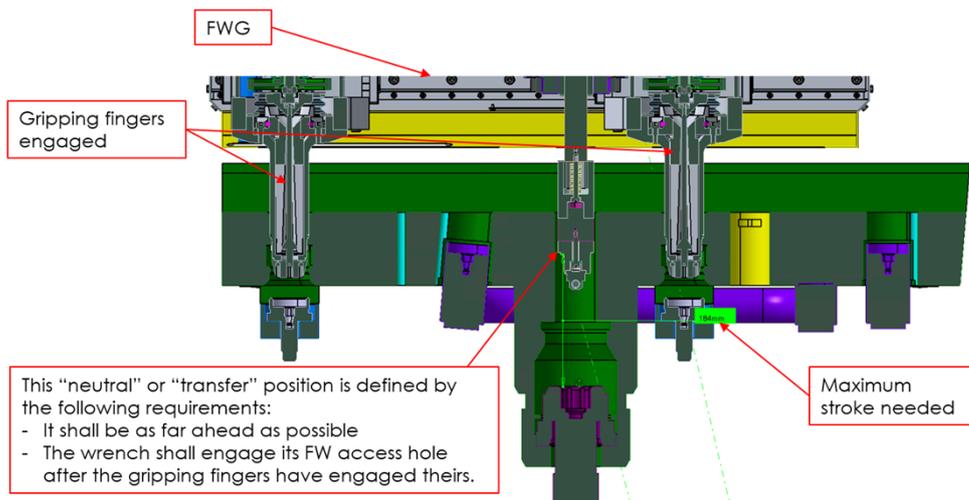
FWG engaged with SB#15; defining the wrench extension stroke
